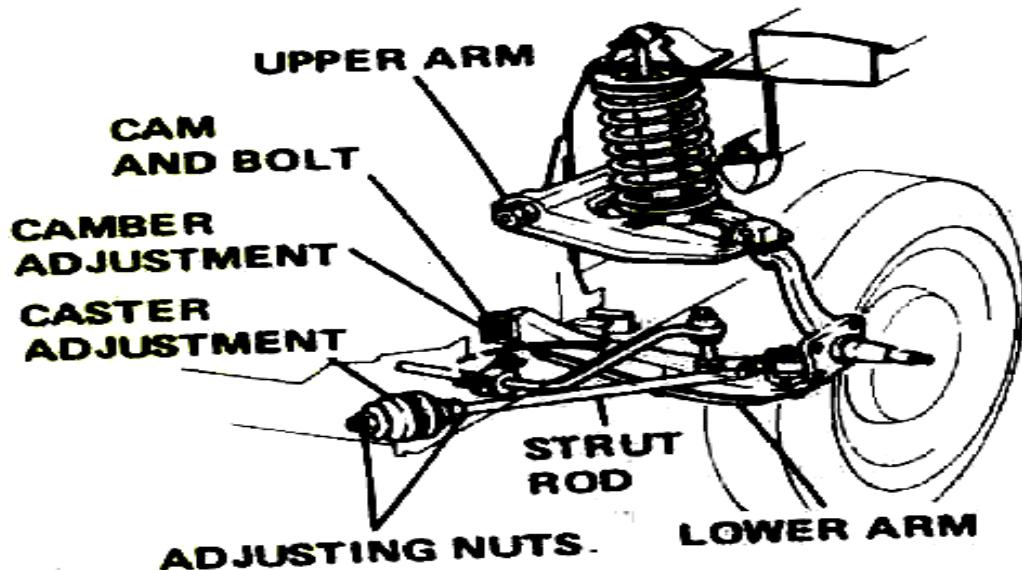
(50-25) Adjusting caster by Changing Length of Strut Rod
